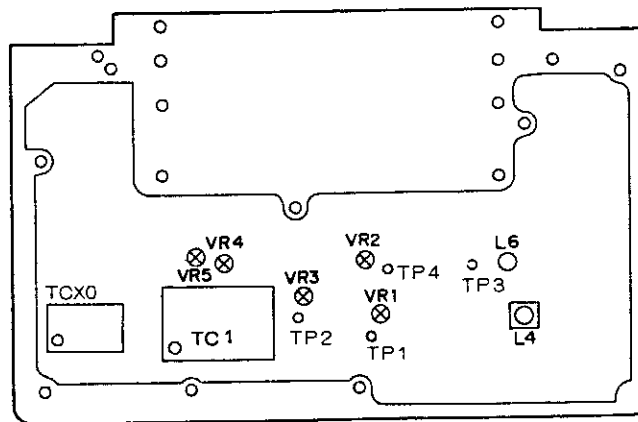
1200 MHz band adjustment: Component layout (upper view)
